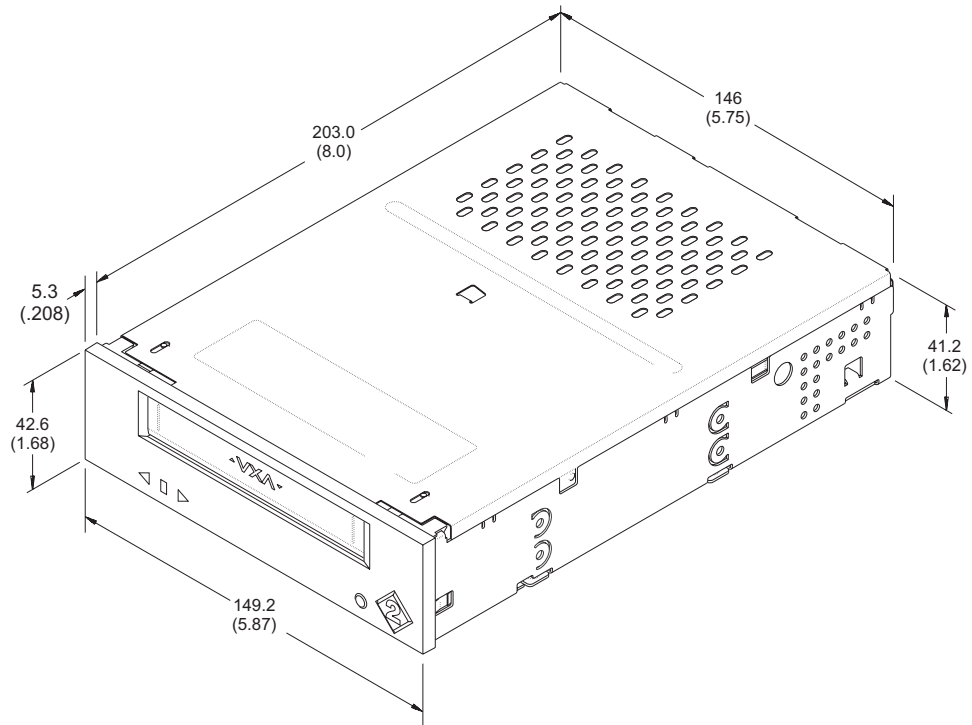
Physical dimensions of the internal model in millimeters (and inches)
